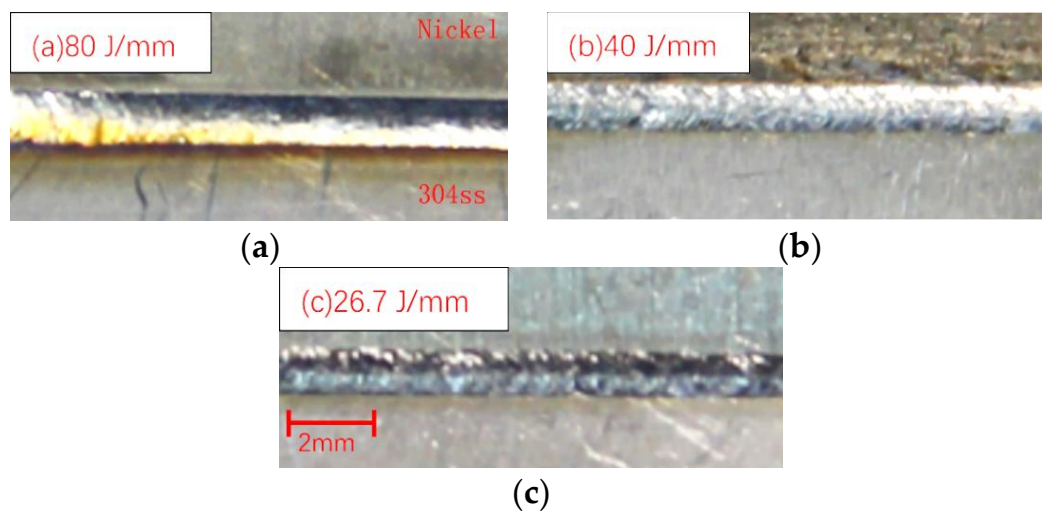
Weld beads by LBW at different heat input. (a) 80 J/mm. (b) 40 J/mm. (c) 26.7 J/mm.
